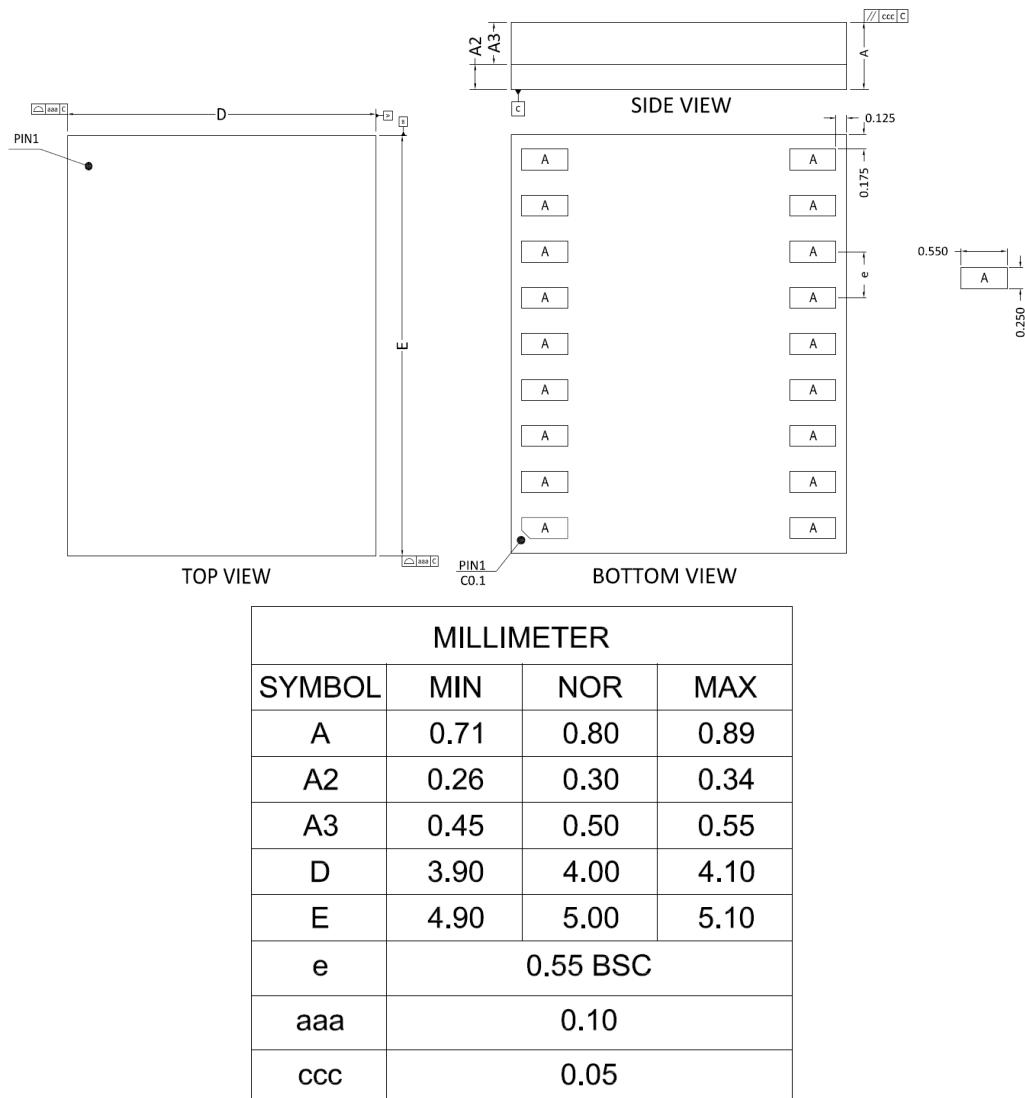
LGA18 Package Shape and Dimension in millimeters
